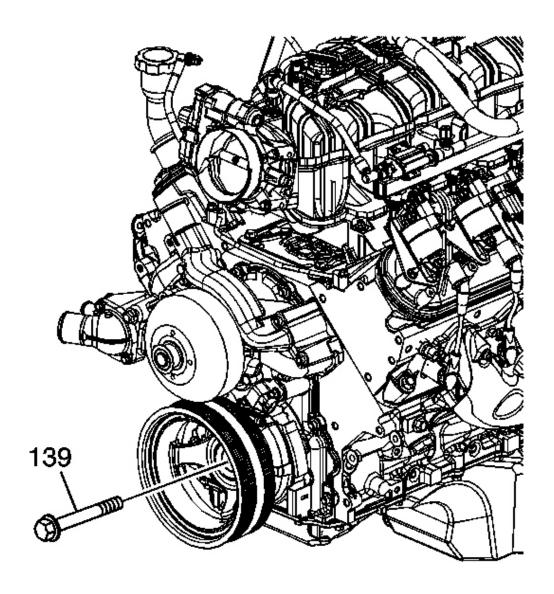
Crankshaft Balancer Bolt Courtesy of GENERAL MOTORS CORP.
